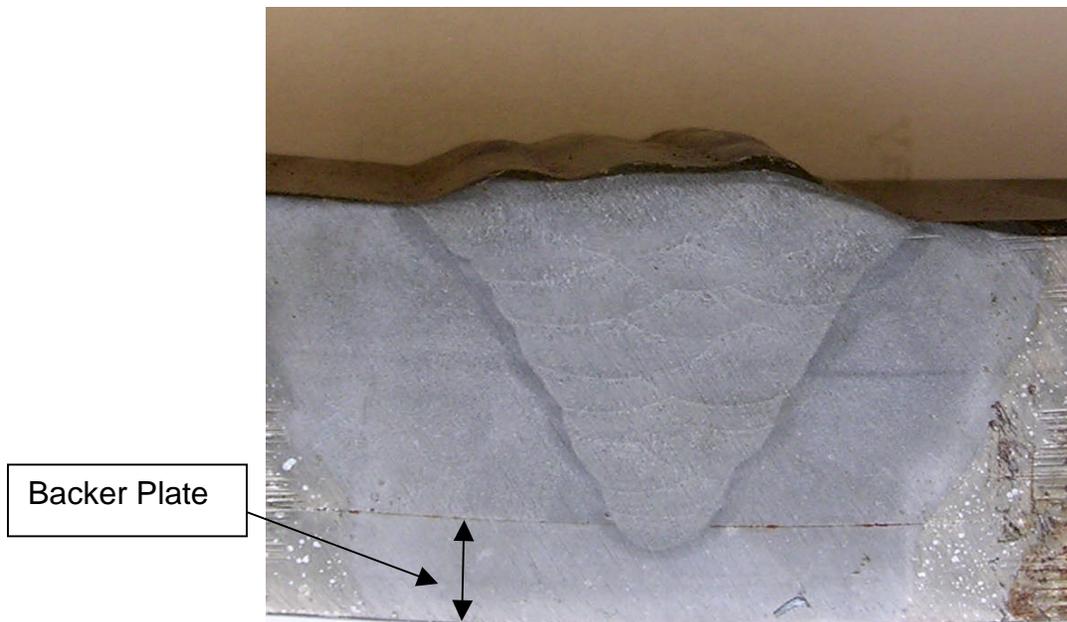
Etched cross-section of a multipass weld in overhead 4G position.
